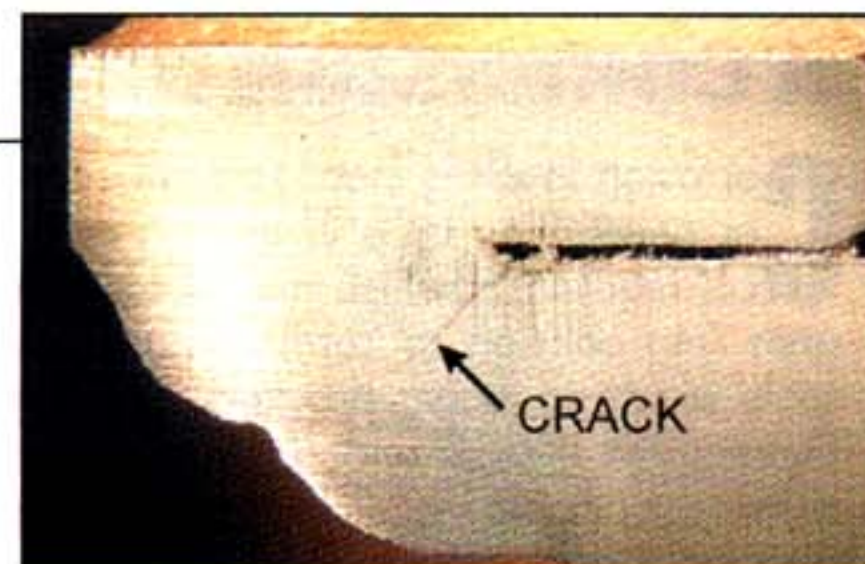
This piping socket weld in steam service suffered caustic stress corrosion cracking, emanating from the root of the weld. The steam was "contaminated" by severe carryover of boiler feedwater
